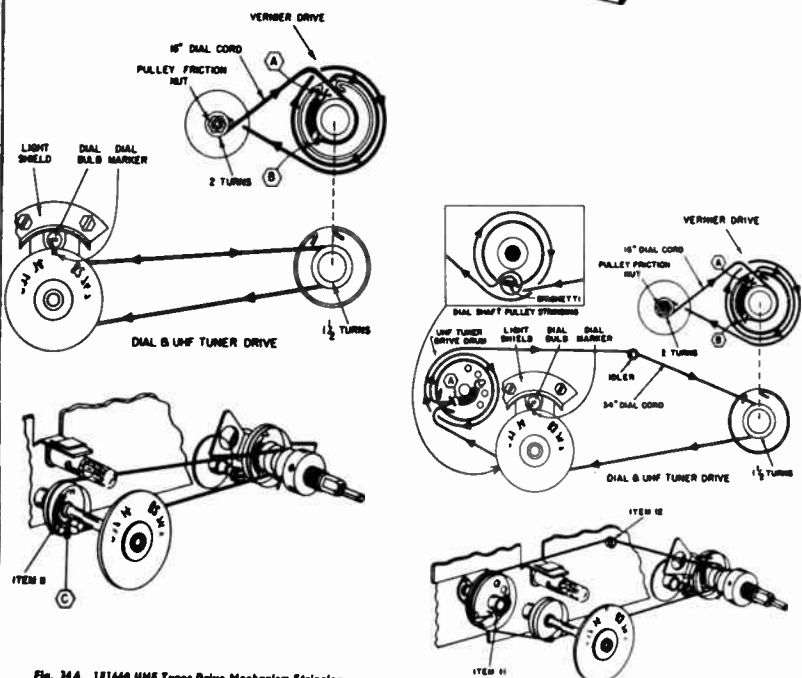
A. 1E1668 UHF Tuner Drive Mechanism Stringing
